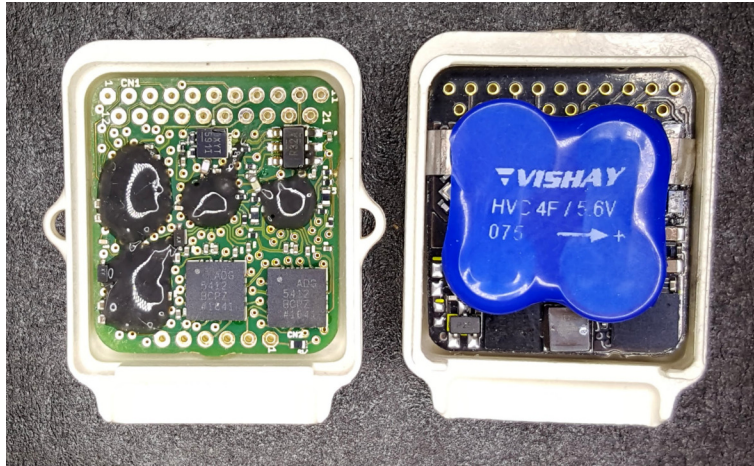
LCP enclosure with UCL PCB on the left and the UW PCB on the right. The mating lip area on both halves of the packaging will be sealed with epoxy before implanted.
